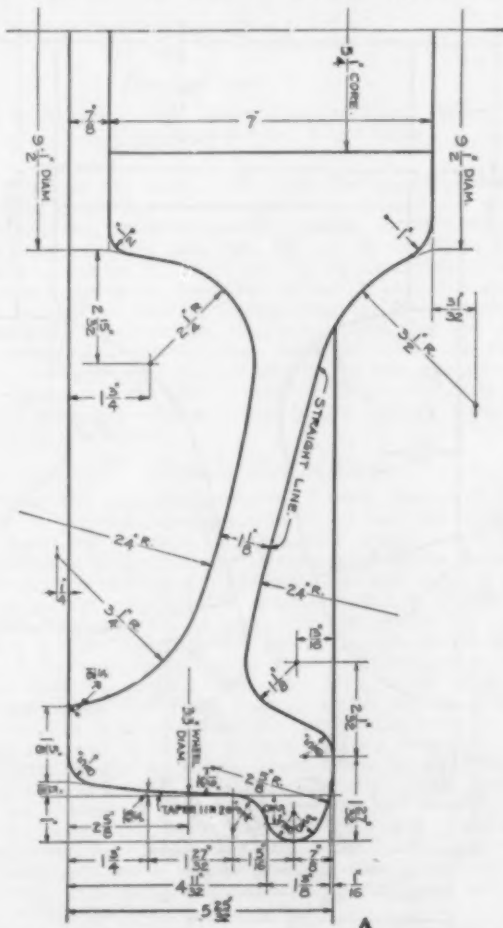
33-in. Cast-iron Wheel for Cars of Maximum Gross Weight Not To Exceed 103,000 lb.—650-lb. Wheel for $4\frac{1}{4}$ -in. by 8-in. Axle
